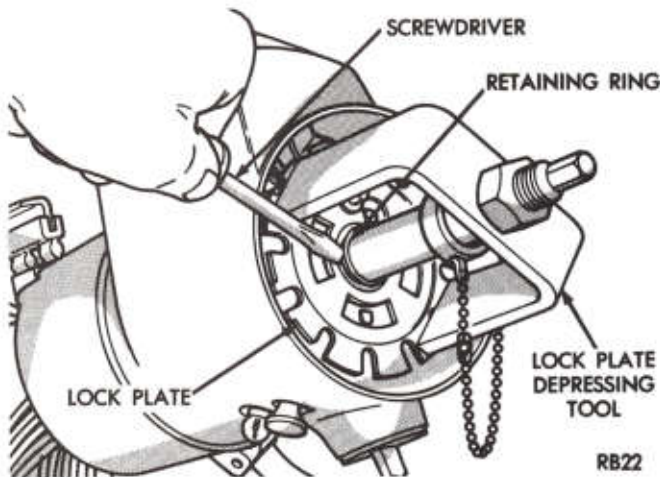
Removing Lock Plate Retaining Ring Using Tool C-4156
